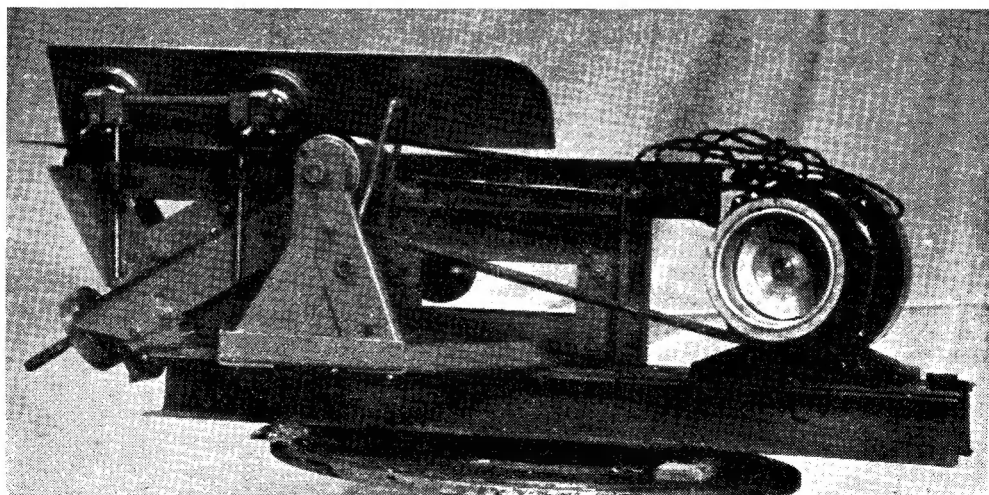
Photo B. Showing driving side with extension bracket for pulleys, also mechanism for operating adjustable fence
